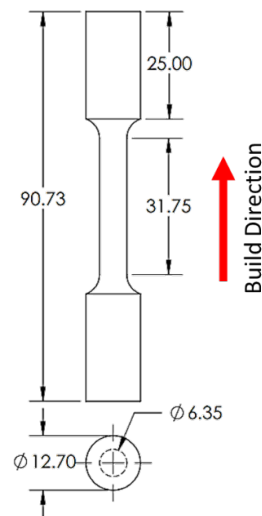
The geometry of tensile test specimens used in this study. All the dimensions are in mm.
